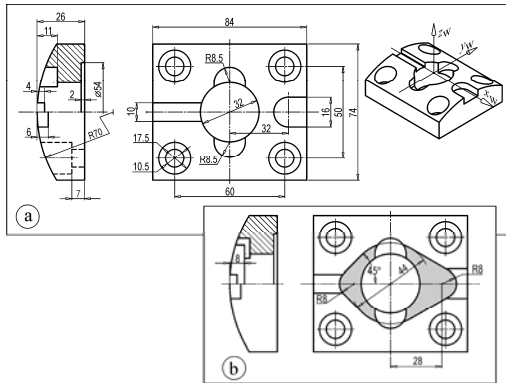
Dimensions of stock (a) and machined part (b) in representative example
